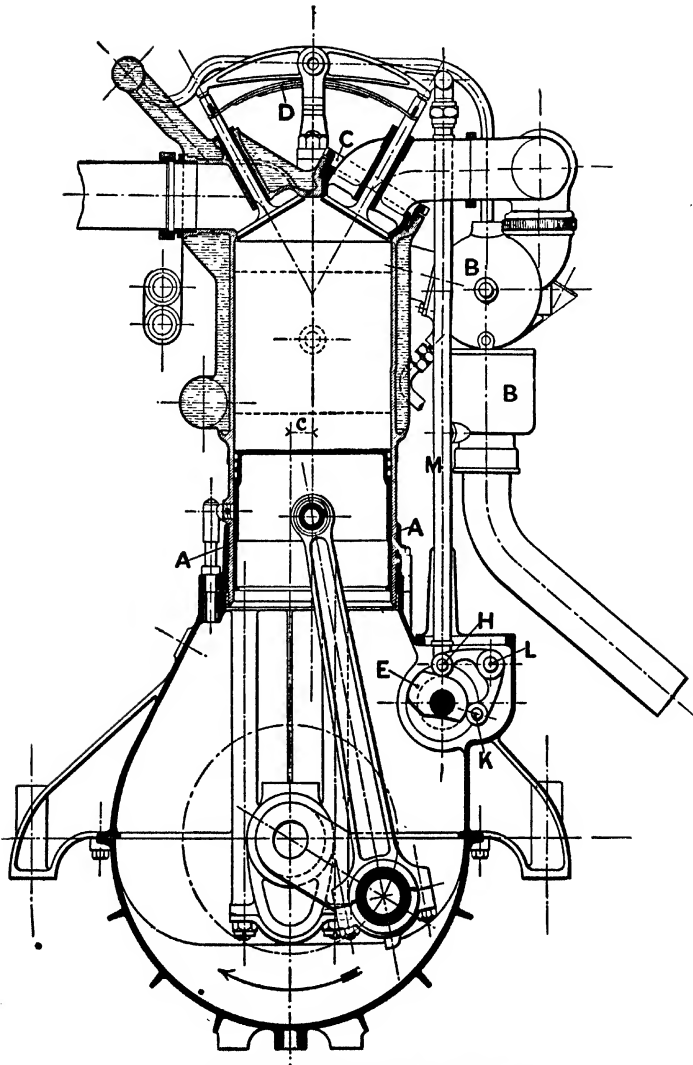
Sectional view of Austro-Daimler aero engine.
